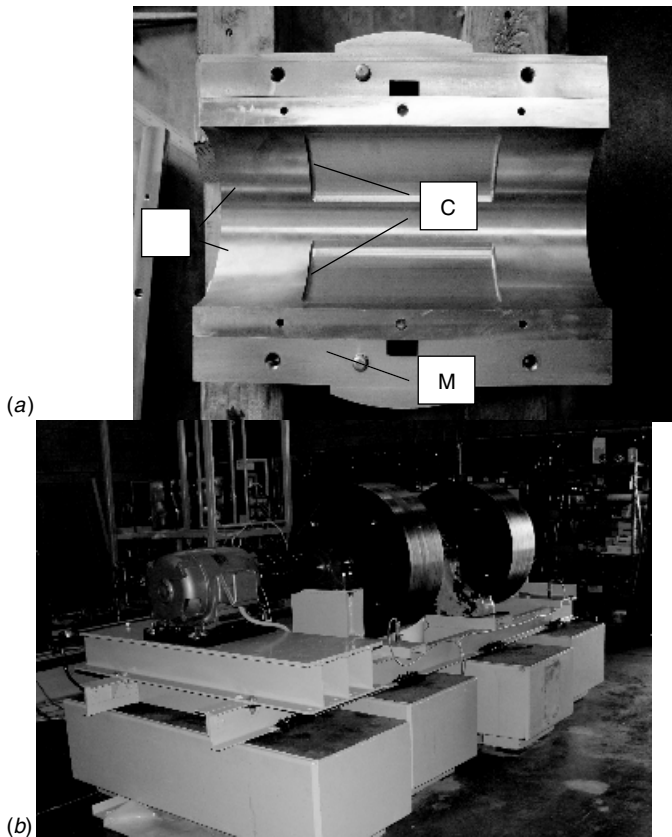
(a) Upper half of the pressurized water bearing (the lower half is similar). Note the hydrostatic pockets, orifice locations, and pressurized water manifold. (b) Bearing test stand in Minden, Nev.
